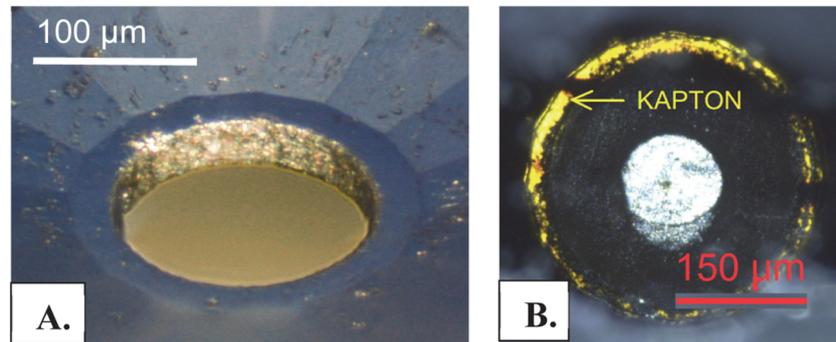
Microscope photographs of circular holes machined in pre-indented gaskets for DAC experiments. (a) Gasket material: rhenium, indented thickness $\approx 30 \mu\text{m}$, hole diameter = $110 \mu\text{m}$; (b) laser-machined boron-epoxy gasket (grey ring) held in a laser-machined polyamide (i.e., Kapton) outer gasket (yellow ring), viewed through the diamond (image credit: Ligang Bai).
